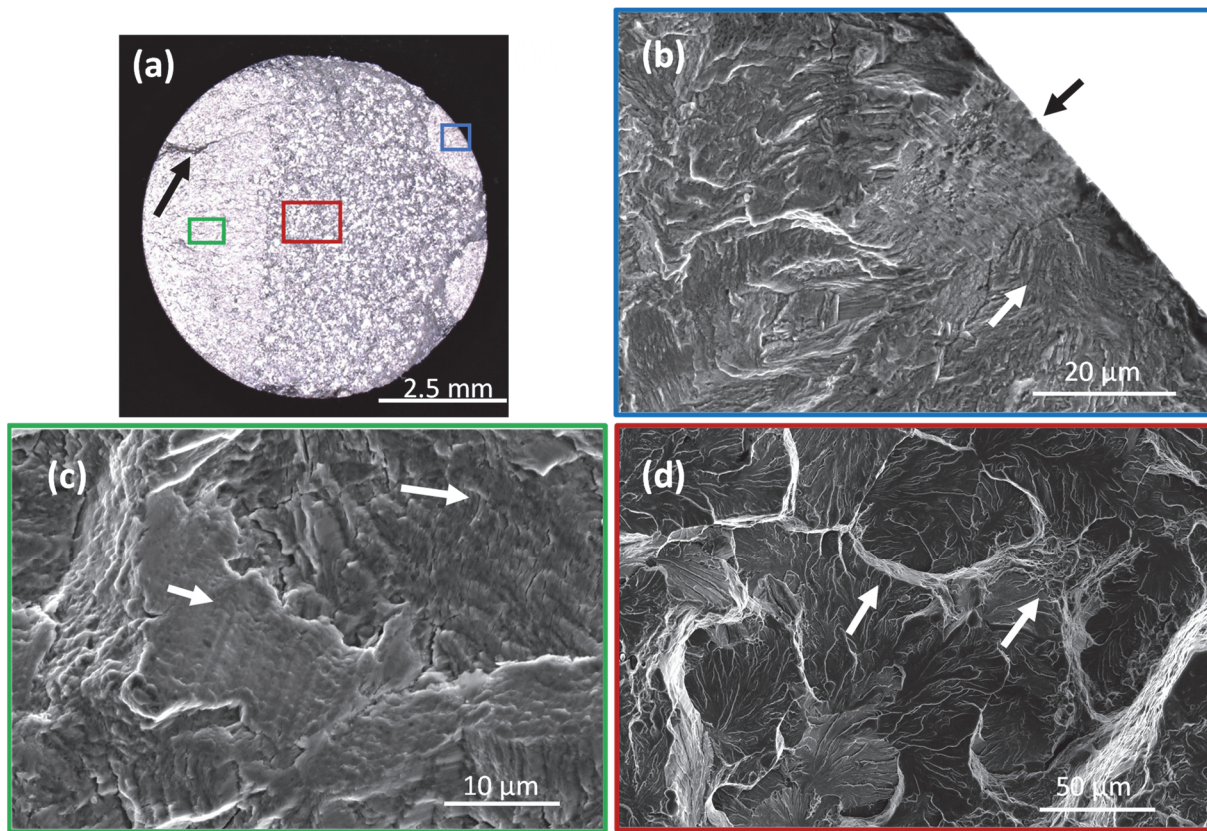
Characteristics of crack growth and final fracture, specimen A4; (a) optical microscopy image of the fracture, (b) fatigue crack initiation at the circumference, (c) fatigue crack growth pattern and the effect of crack closure, (d) final fracture.
